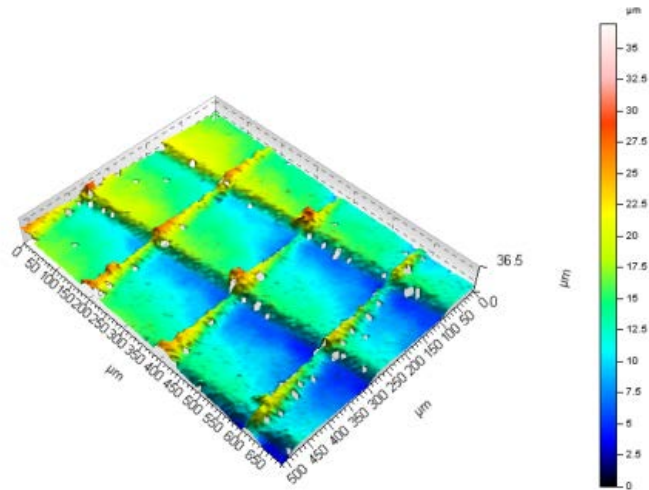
Micro pattern structure machined using three direction 90° machining
